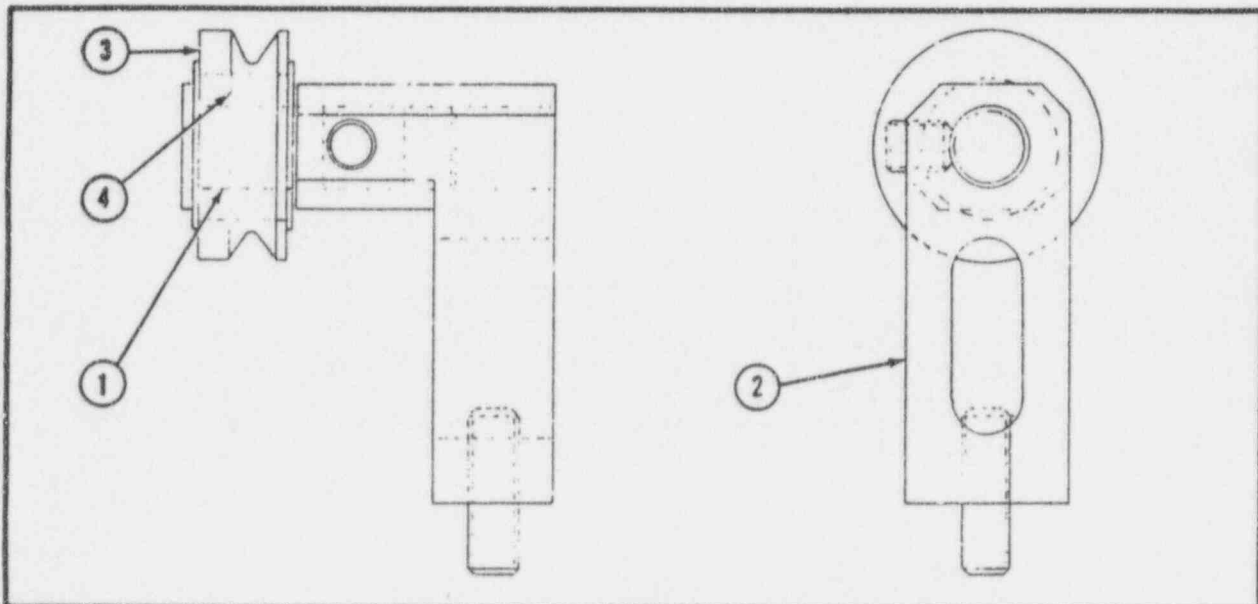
COBALT COLLIMATOR MAIN CROSS PULLEY ASSEMBLY
